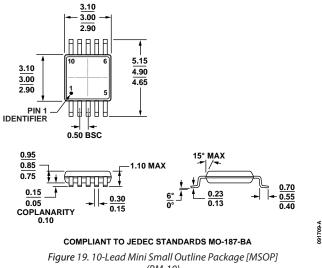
10-Lead Mini Small Outline Package [MSOP] (RM-10) Dimensions shown in millimeters
